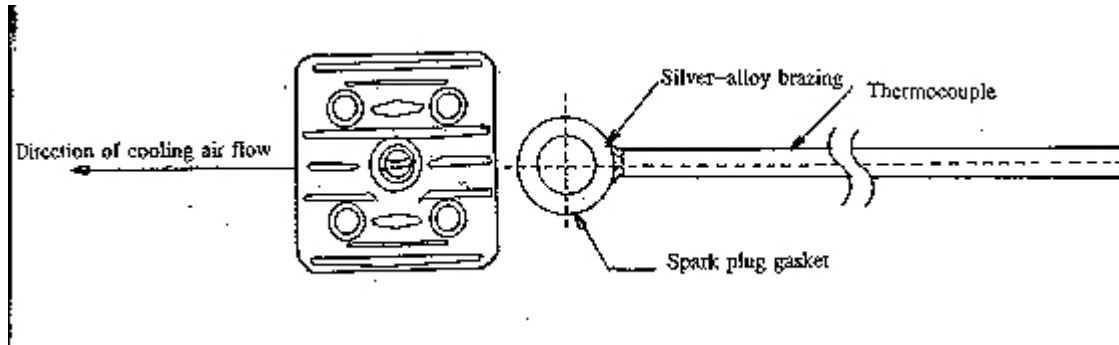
Thermocouple installation position and example of thermocouple for spark plug gasket.
